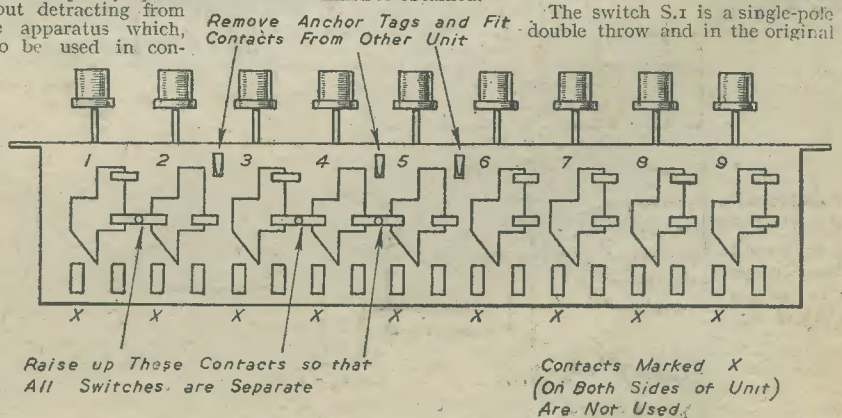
View of one side of press button unit, showing alteration necessary.
